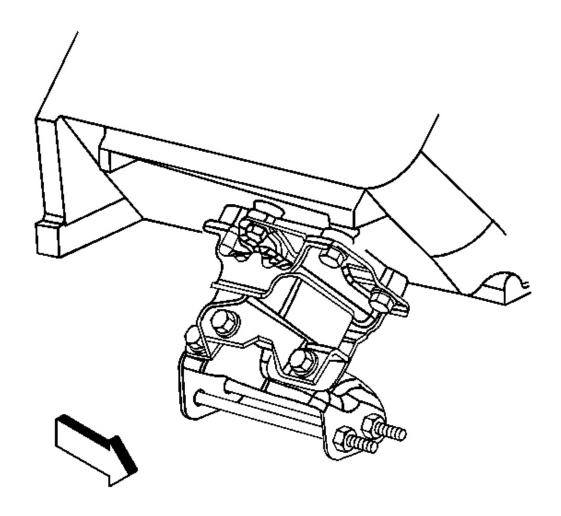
Engine Mount Courtesy of GENERAL MOTORS CORP.
